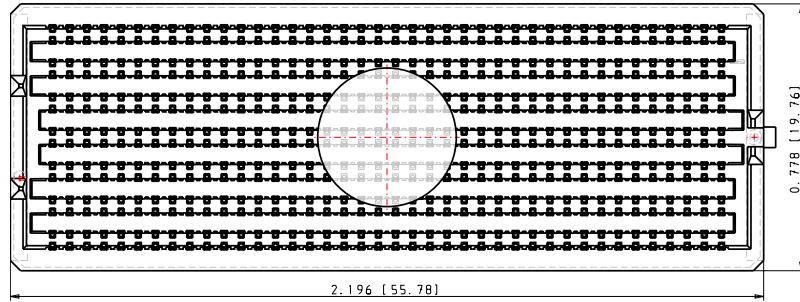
Part drawing of FMC+ connector [SAM]
